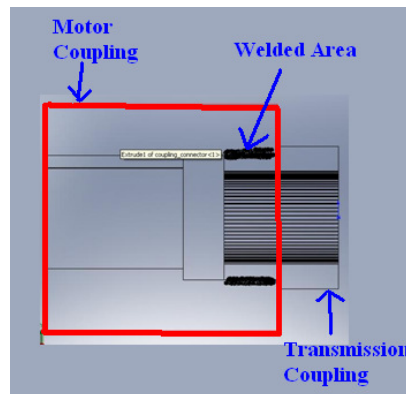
Welded Area of Vacuum Brazing
